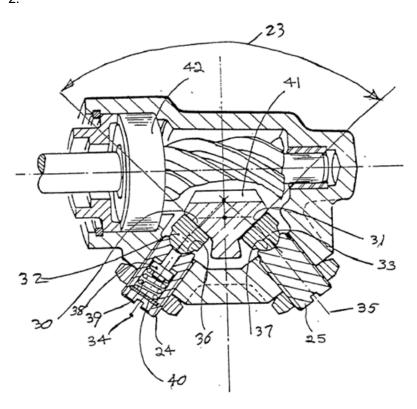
illustrates a rack and pinion gearing including a rack (41) which is biased against a pinion gear using two yokes (25) and respective springs (39).
